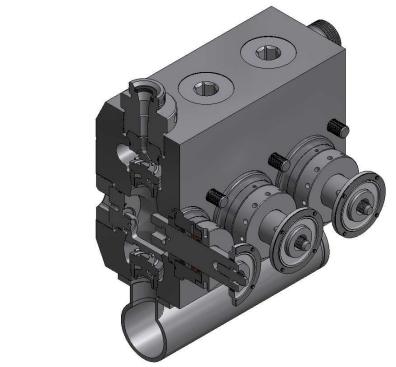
FLUID END ASSEMBLY 2.75" - 3" SECTION A-A
